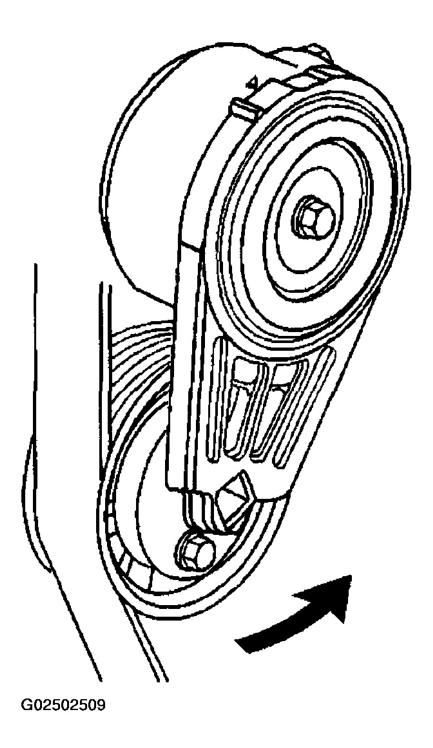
Testing Drive Belt Tensioner Courtesy of GENERAL MOTORS CORP.
